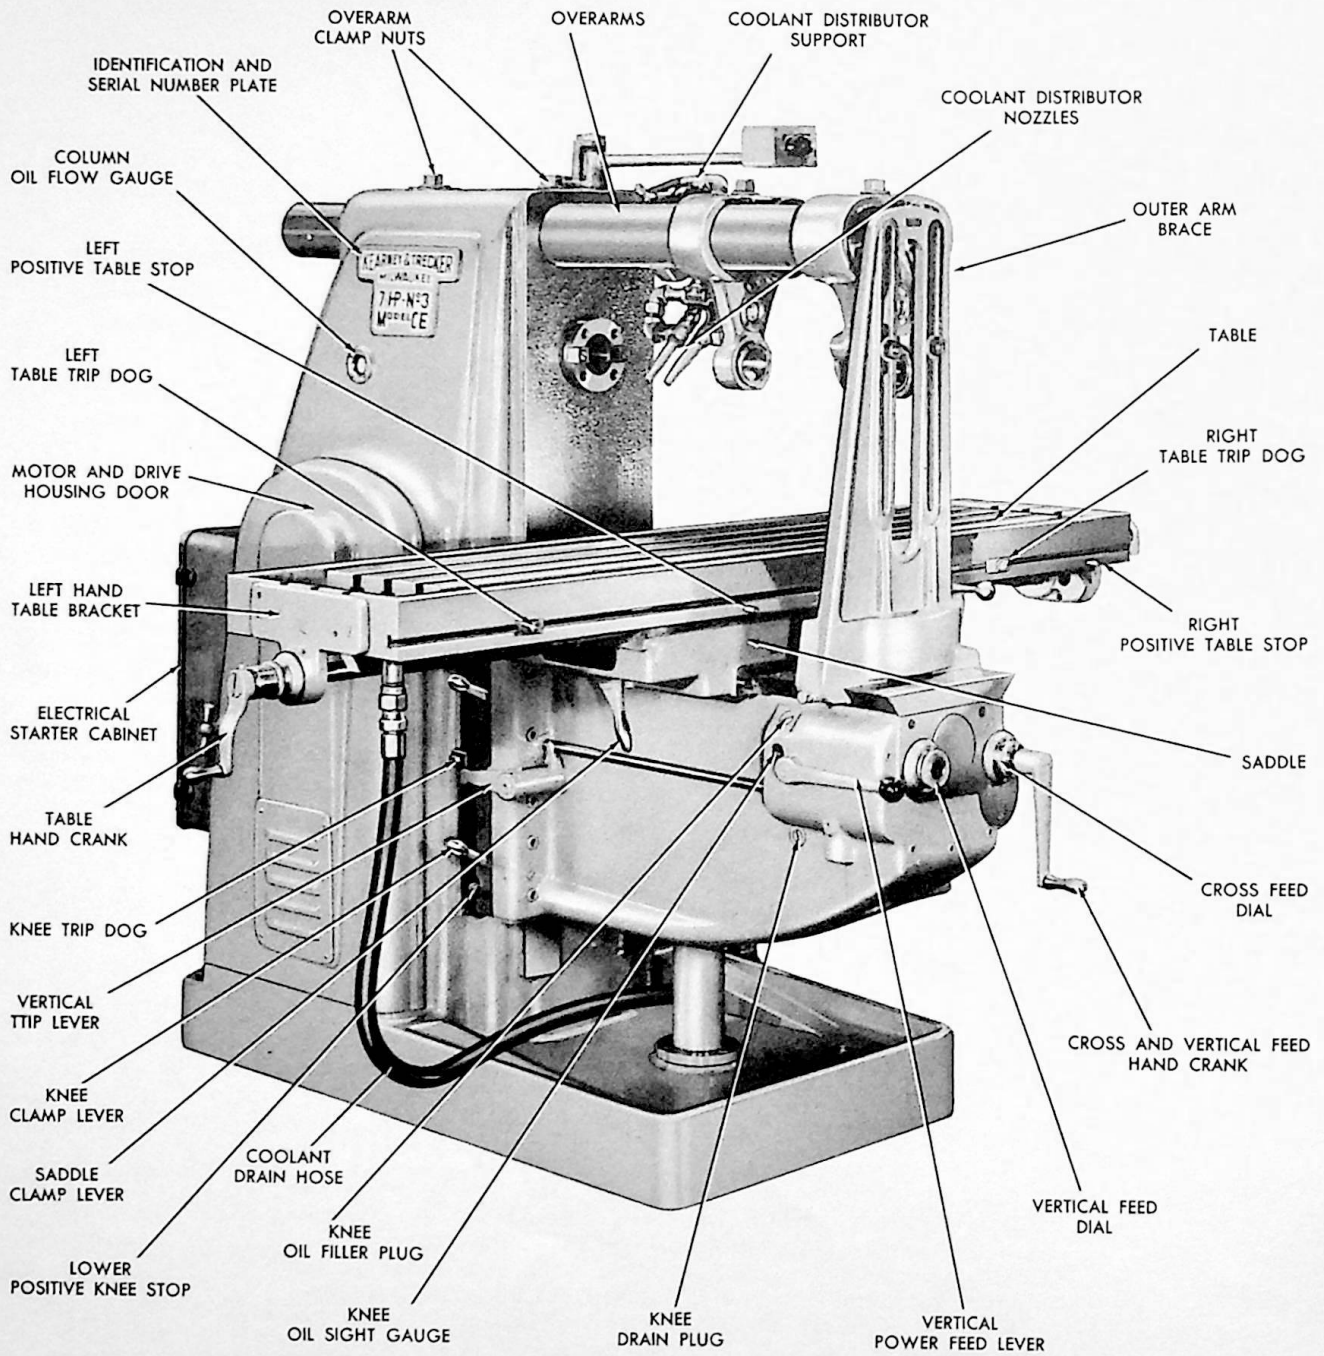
7 1/2hp No. 3 Model CE Plain Machine—left front view
